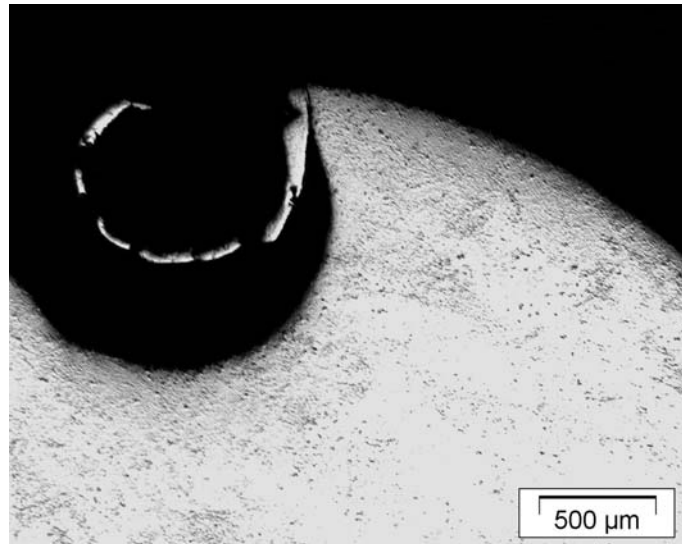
Light microscopy of a saw tooth with a chip of freecutting steel of quality AISI 12L13 as a cold welding.
